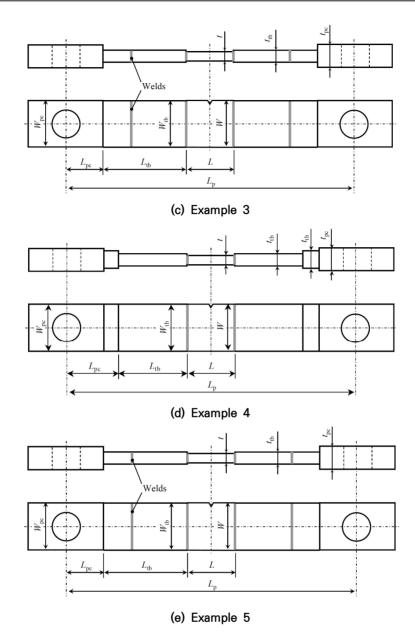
Examples of the shapes of tab plates and pin chucks
